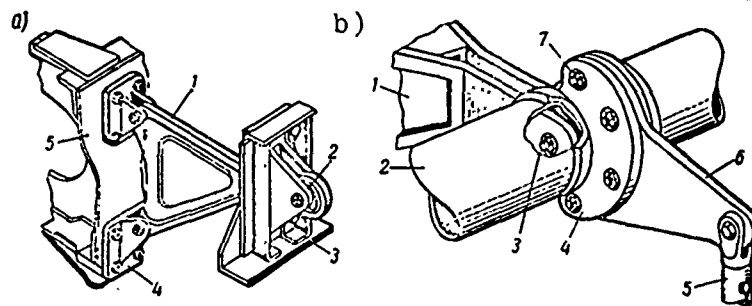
The elevator attachment points: a) lateral elevator attachment point: 1 - mounting bracket of elevator; 2 - bracket on elevator; 3 - elevator spar; 4 - bracket on stabilizer; 5 - stabilizer spar; b) fitting of the elevator central support: 1 - bracket; 2 - elevator tube; 3 - axial bolt; 4 - elevator flange with four holes; 5 - elevator control rod; 6 - single actuating arm of elevator; 7 - four connecting bolts of both elevator halves.
